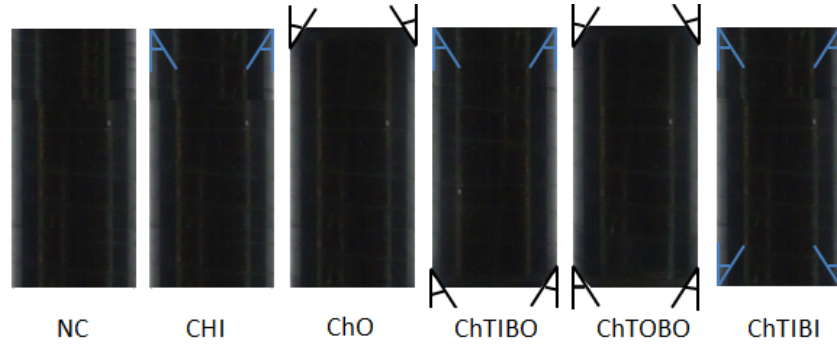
Various triggers used on the CFRP tubes. NC - No Trigger, ChI - 45° inner chamfer, ChO - 45° outer chamfer, T - Top, B - Bottom..
